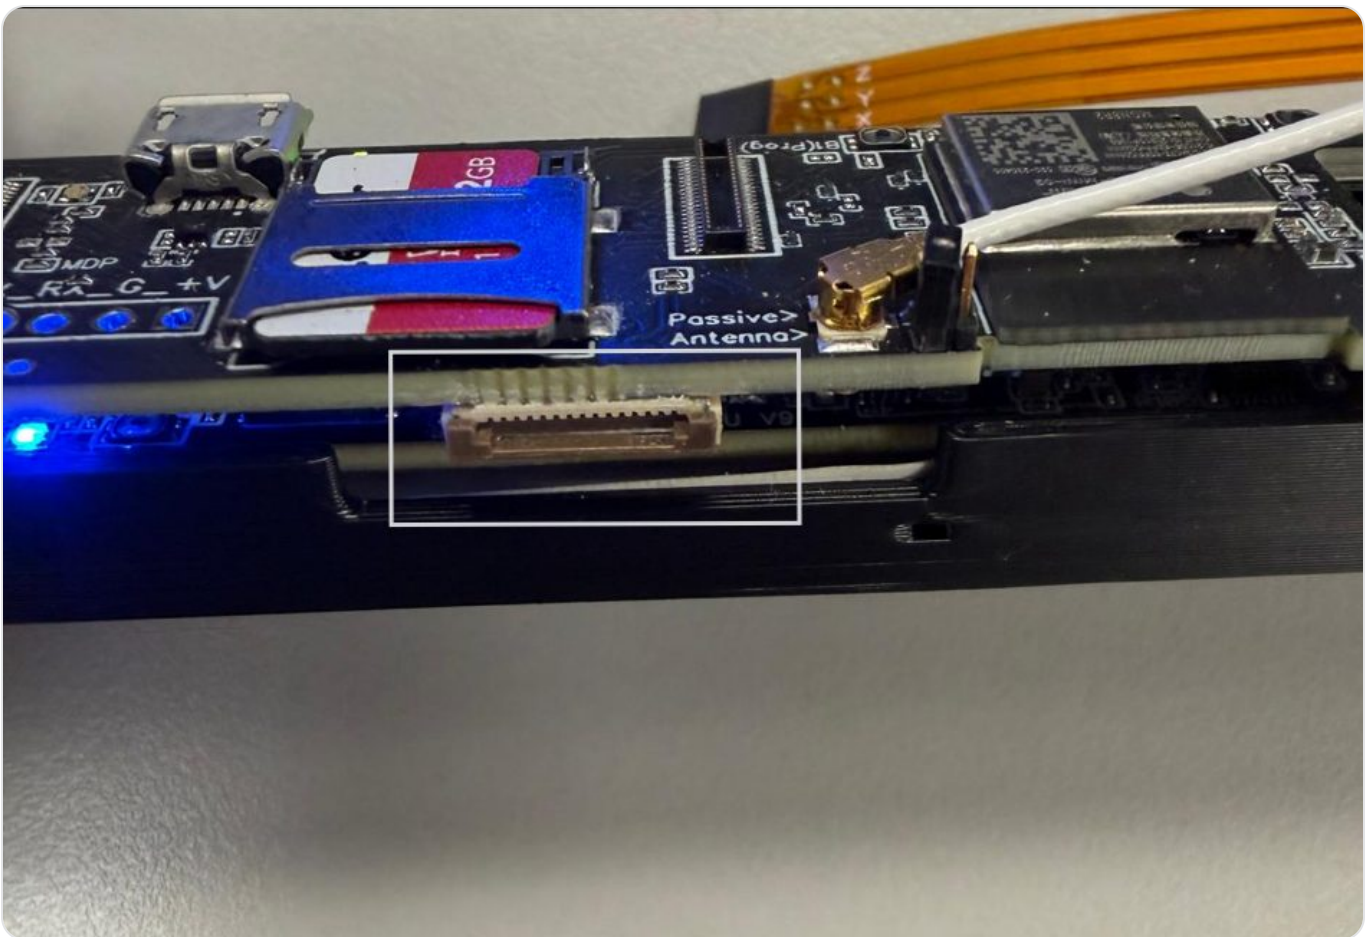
Flex-cable connector on the side of the MiniACB board (white highlight).
